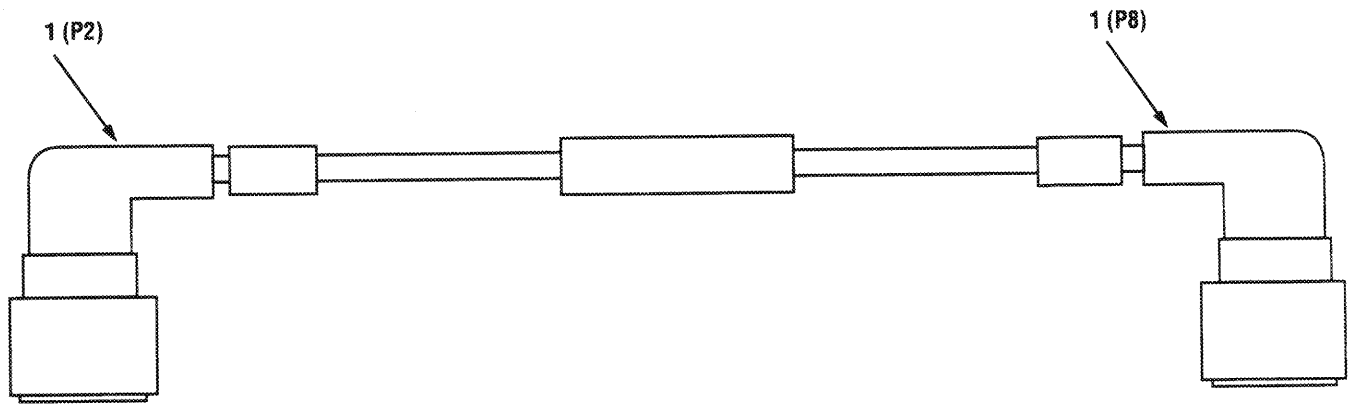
Cable Assembly W64 (3-94307.0000//B)
